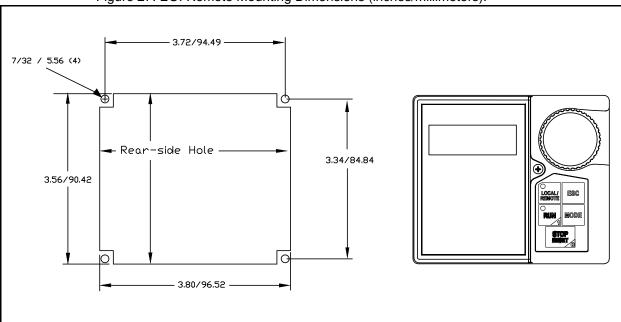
EOI Remote Mounting Dimensions (inches/millimeters).
